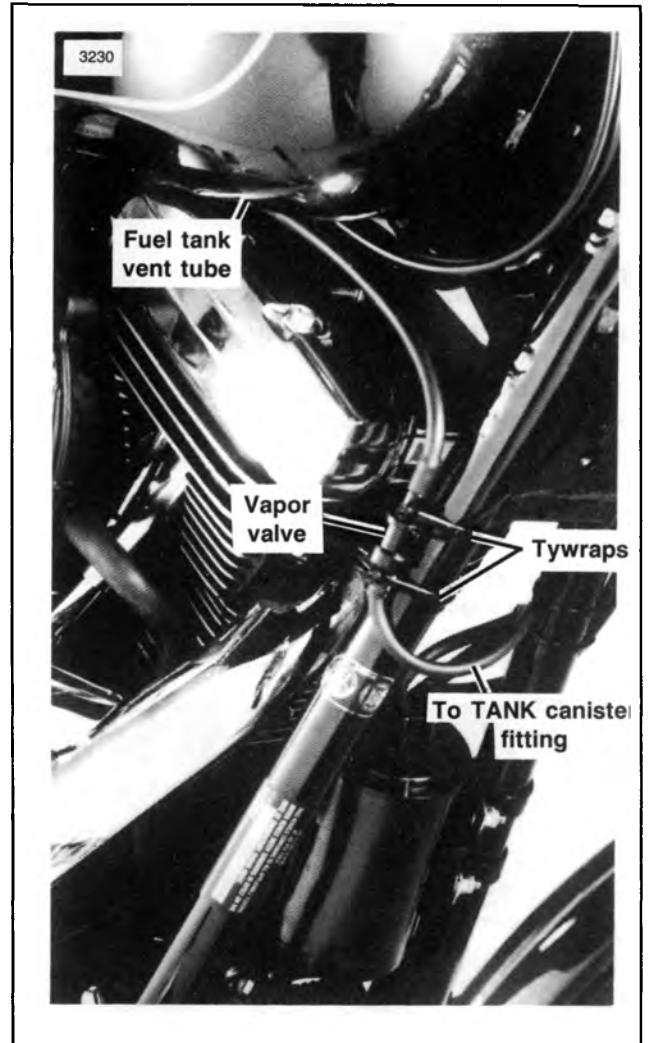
Vapor Valve Location — FXLR, 1988 FXRS
